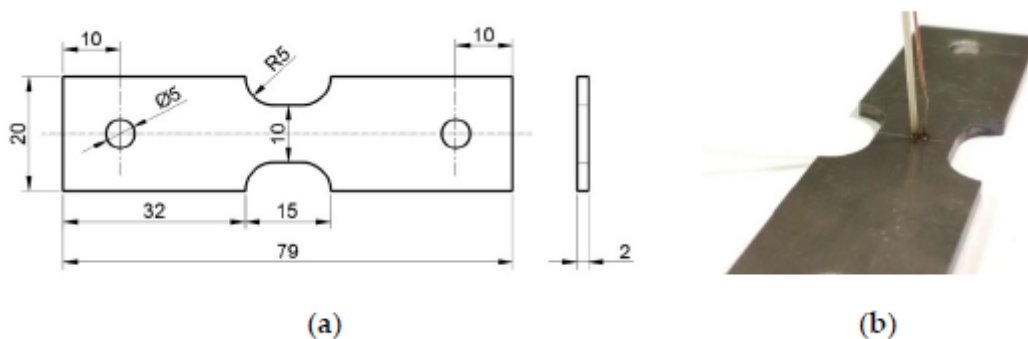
Tensile test specimen ready for Gleeble simulation: (a) dimensions of the specimen; (b) specimen with a thermocouple welded onto it.
